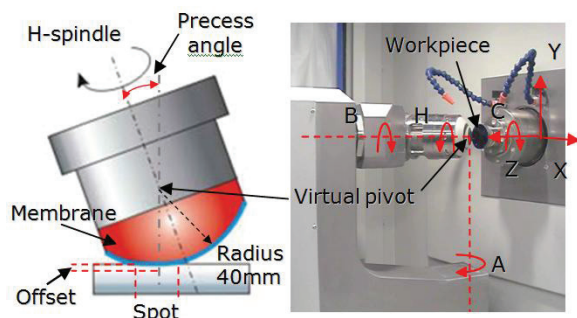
Principle of precessed polishing tool and 7-Axis CNC machine.
